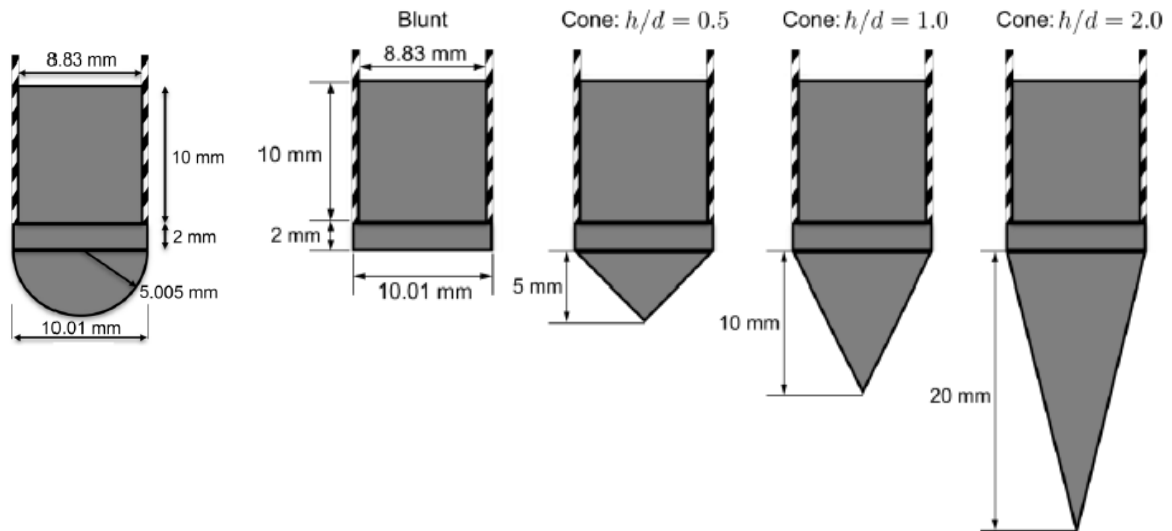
Schematic and dimension of end-pieces for cantilever rod (Hatching represents the rod pipe) (Cioncolini, et al., 2022)
